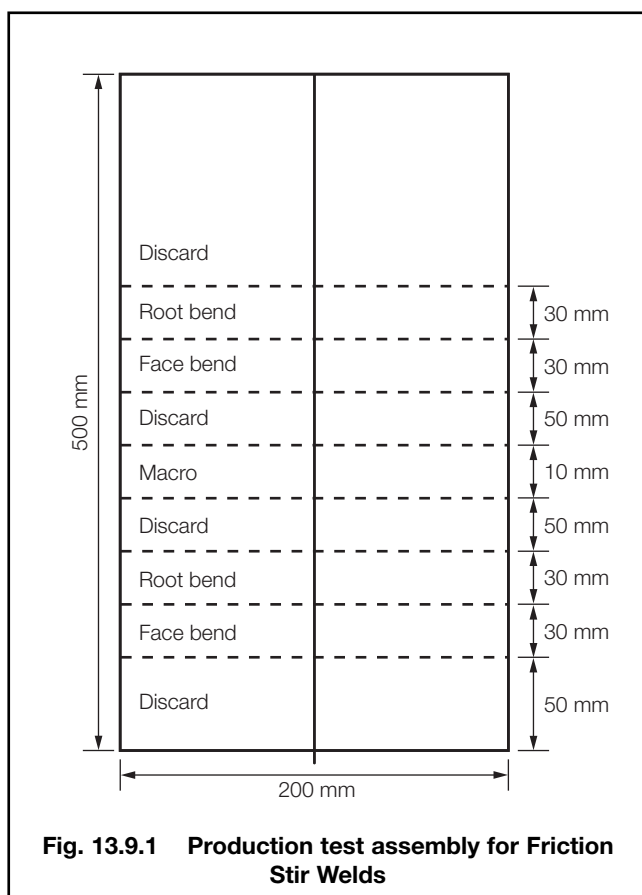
Production test assembly for Friction Stir Welds
